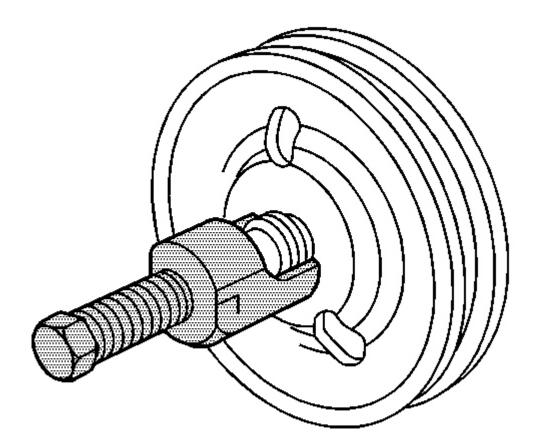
View Of Power Steering Pump Pulley Remover Courtesy of GENERAL MOTORS CORP.
